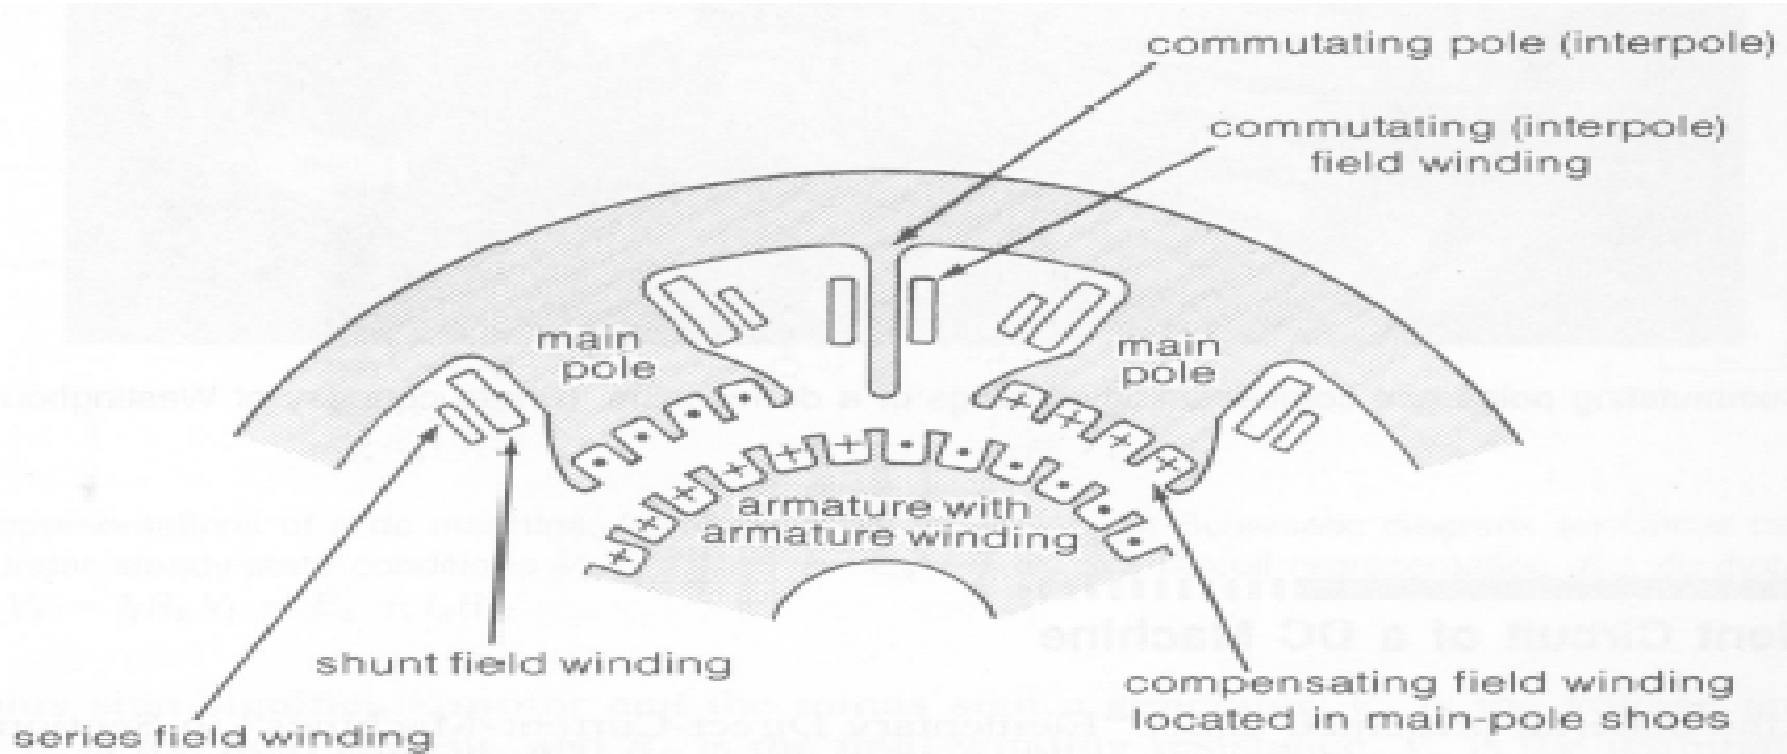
Section of a dc machine illustrating the arrangement of various field windings.
